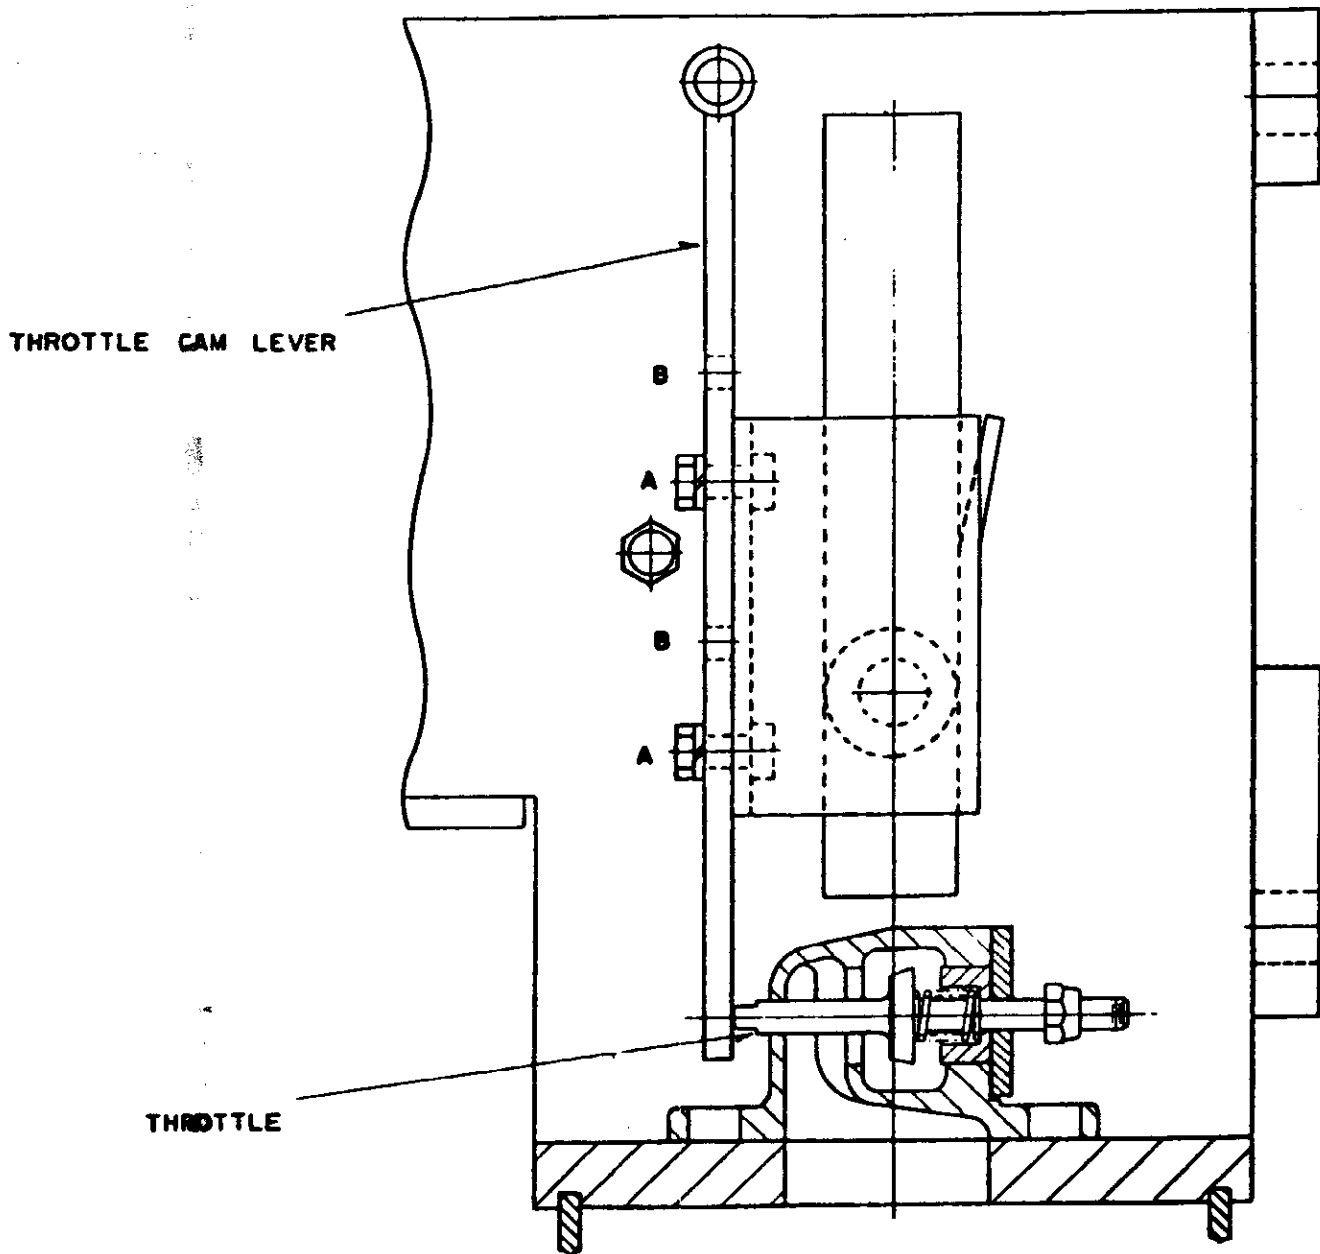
Throttle Valve Lever (Mechanism Closed)
